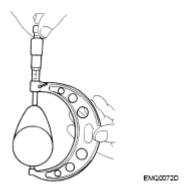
Measuring Camshaft Cam Height Courtesy of NISSAN MOTOR CO., U.S.A.
